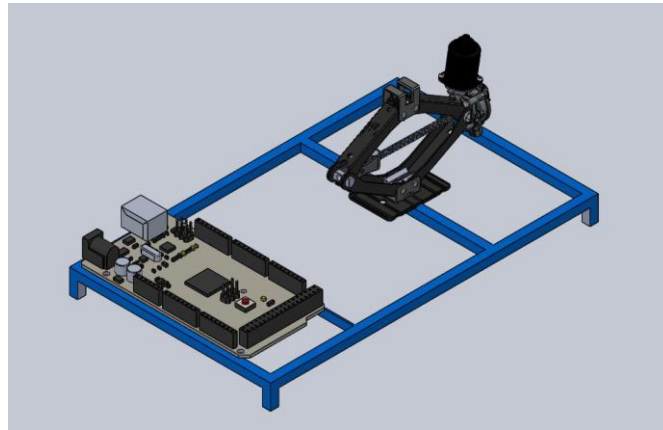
DRAWING FOR DESIGN AND FABRICATION OF ANDROID APP CONTROLLED AUTOMOBILE SCREW JACK
